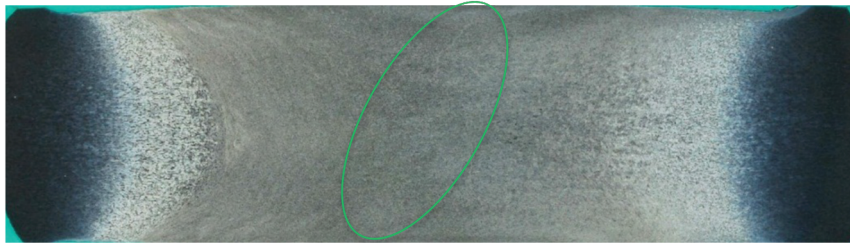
Transverse section of laser cleaned weld (240 W, General Lasertronics). Note the fine, sharp, slightly undulating white line running from root to crown toward the center of the weld indicating ROD.
